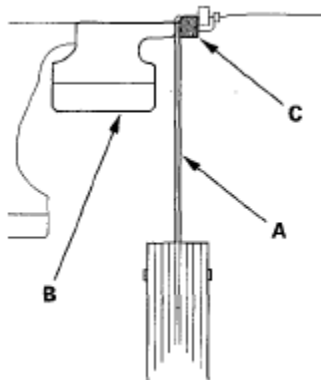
Checking Clearance Between 4th Gear And Cotters
